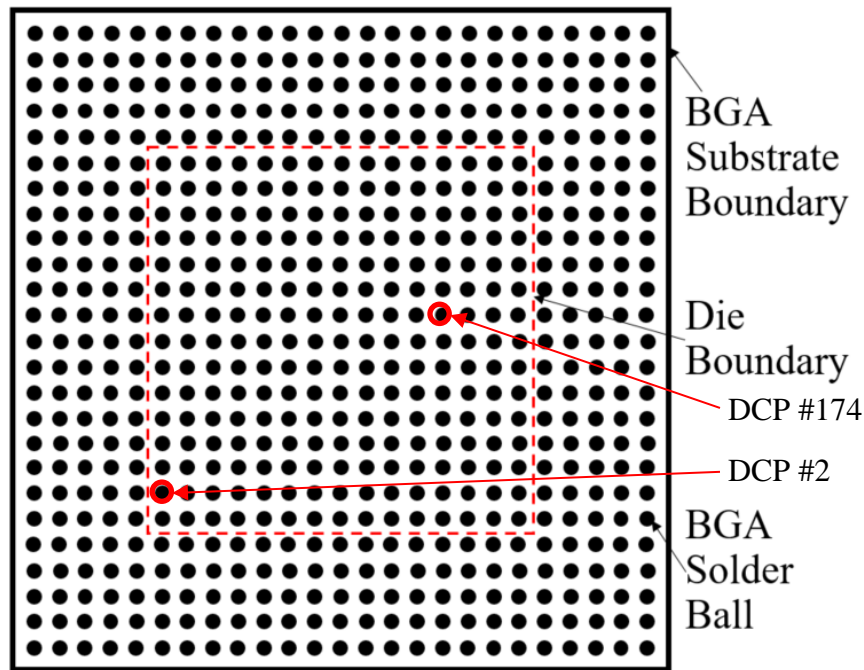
BGA solder ball footprint of Type – B 17 x 17 FCBGA test vehicles
